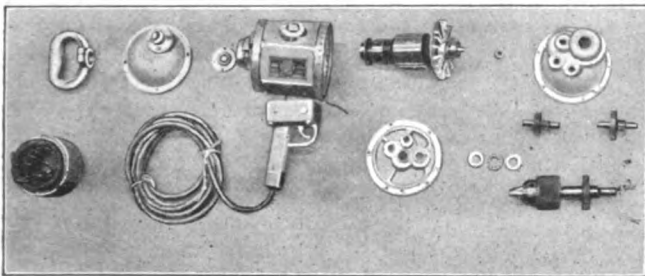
PARTS OF THE BLACK & DECKER DRILL
